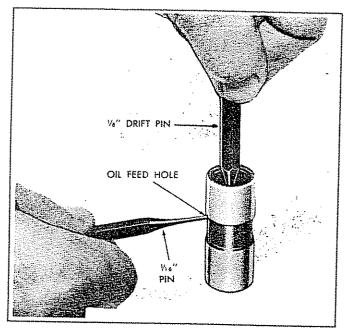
A2-15-Assembling Hydraulic Lifter tension (Fig. 6A2-15).
